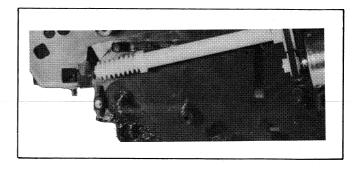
Adjustment of Cassette Up Gears-(1)
